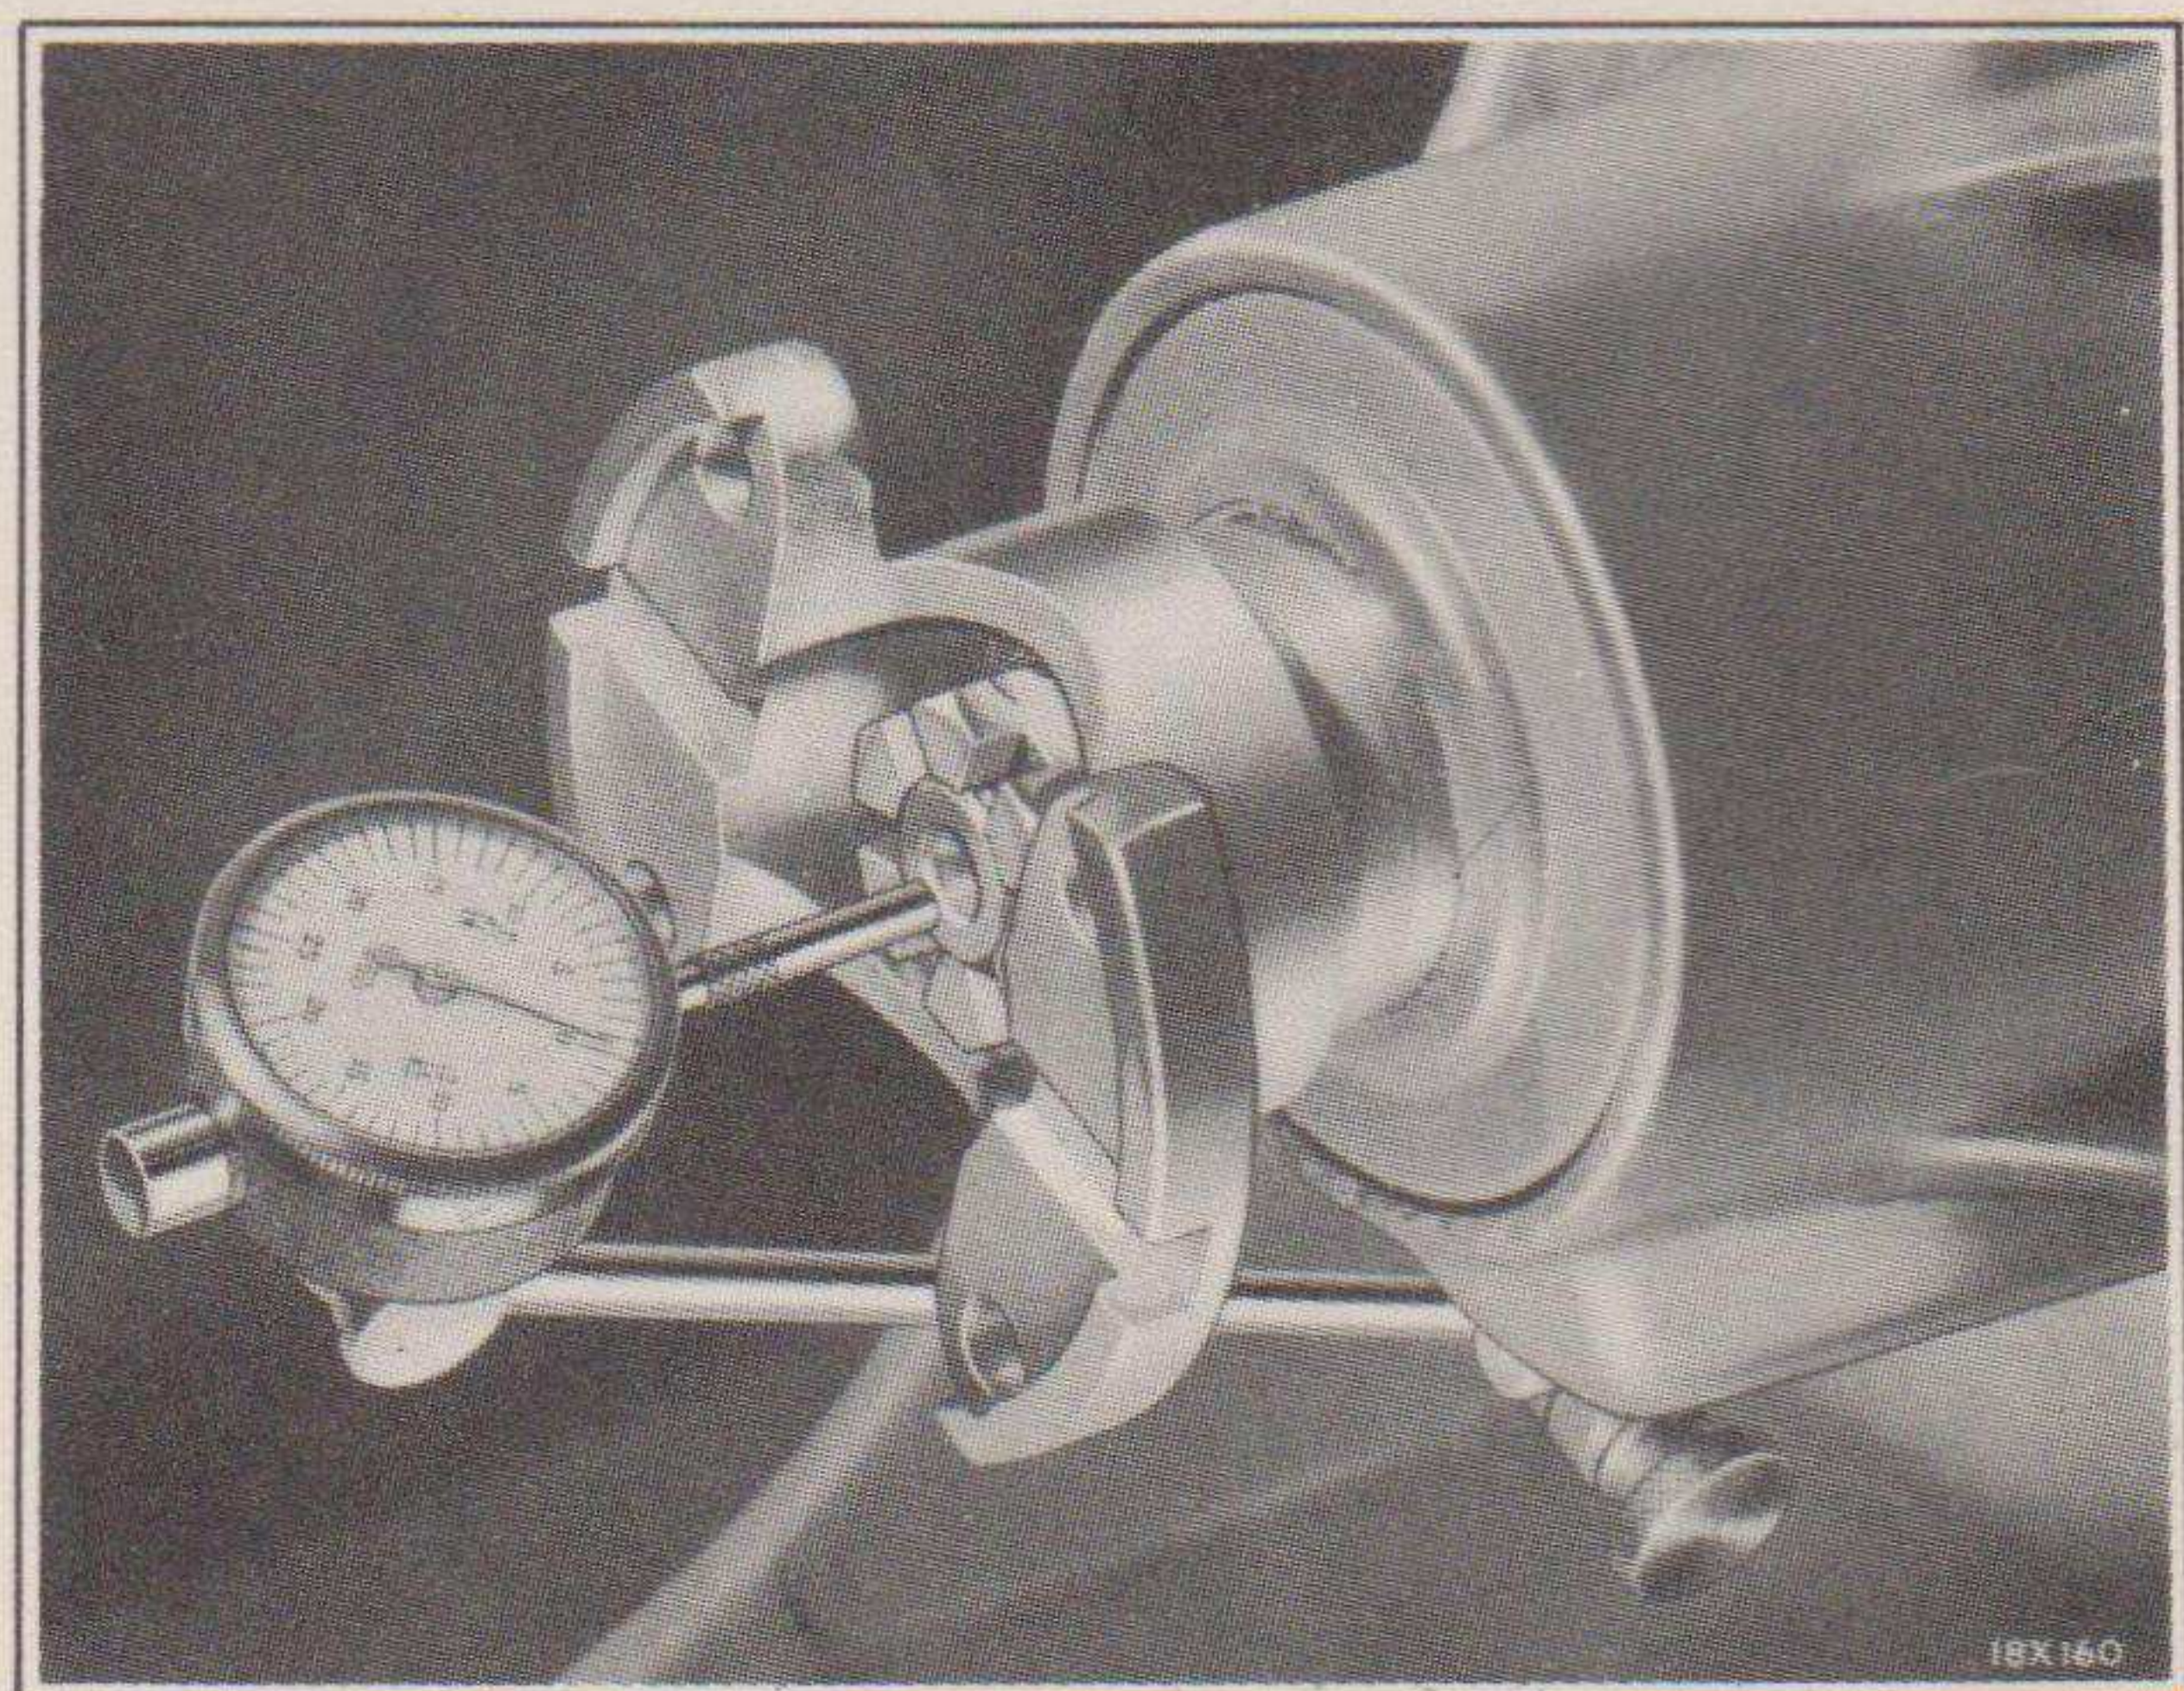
Checking End-Play of Drive Pinion with Indicator (Tool C-430)
